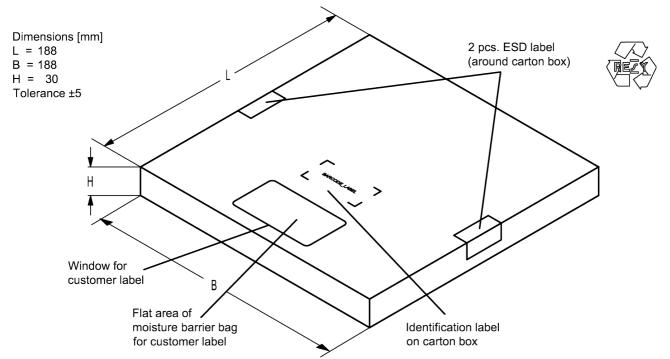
Drawing of folding box for reel with diameter of 180 mm.
